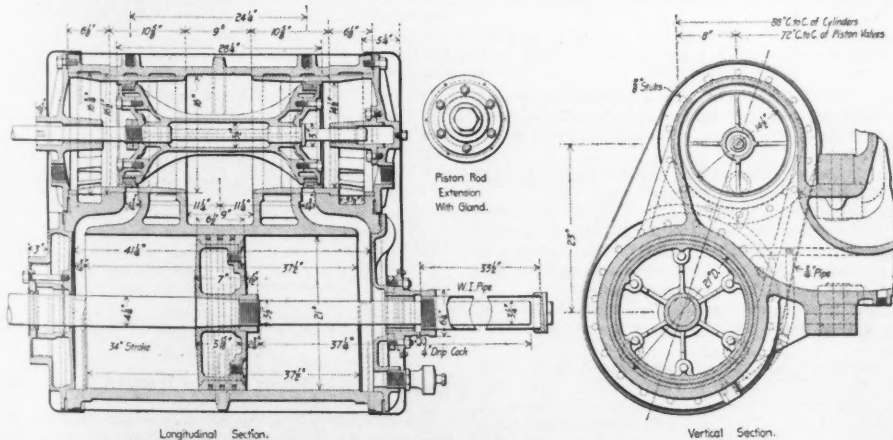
DETAILS OF CYLINDER, STEAM CHEST AND PISTON VALVE.
